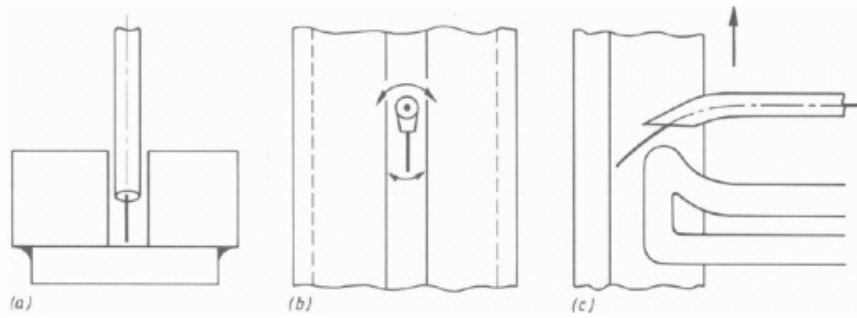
Bent contact-tip: (a) end view, (b) top view, (c) side view including copper bend weld pool support [87]
